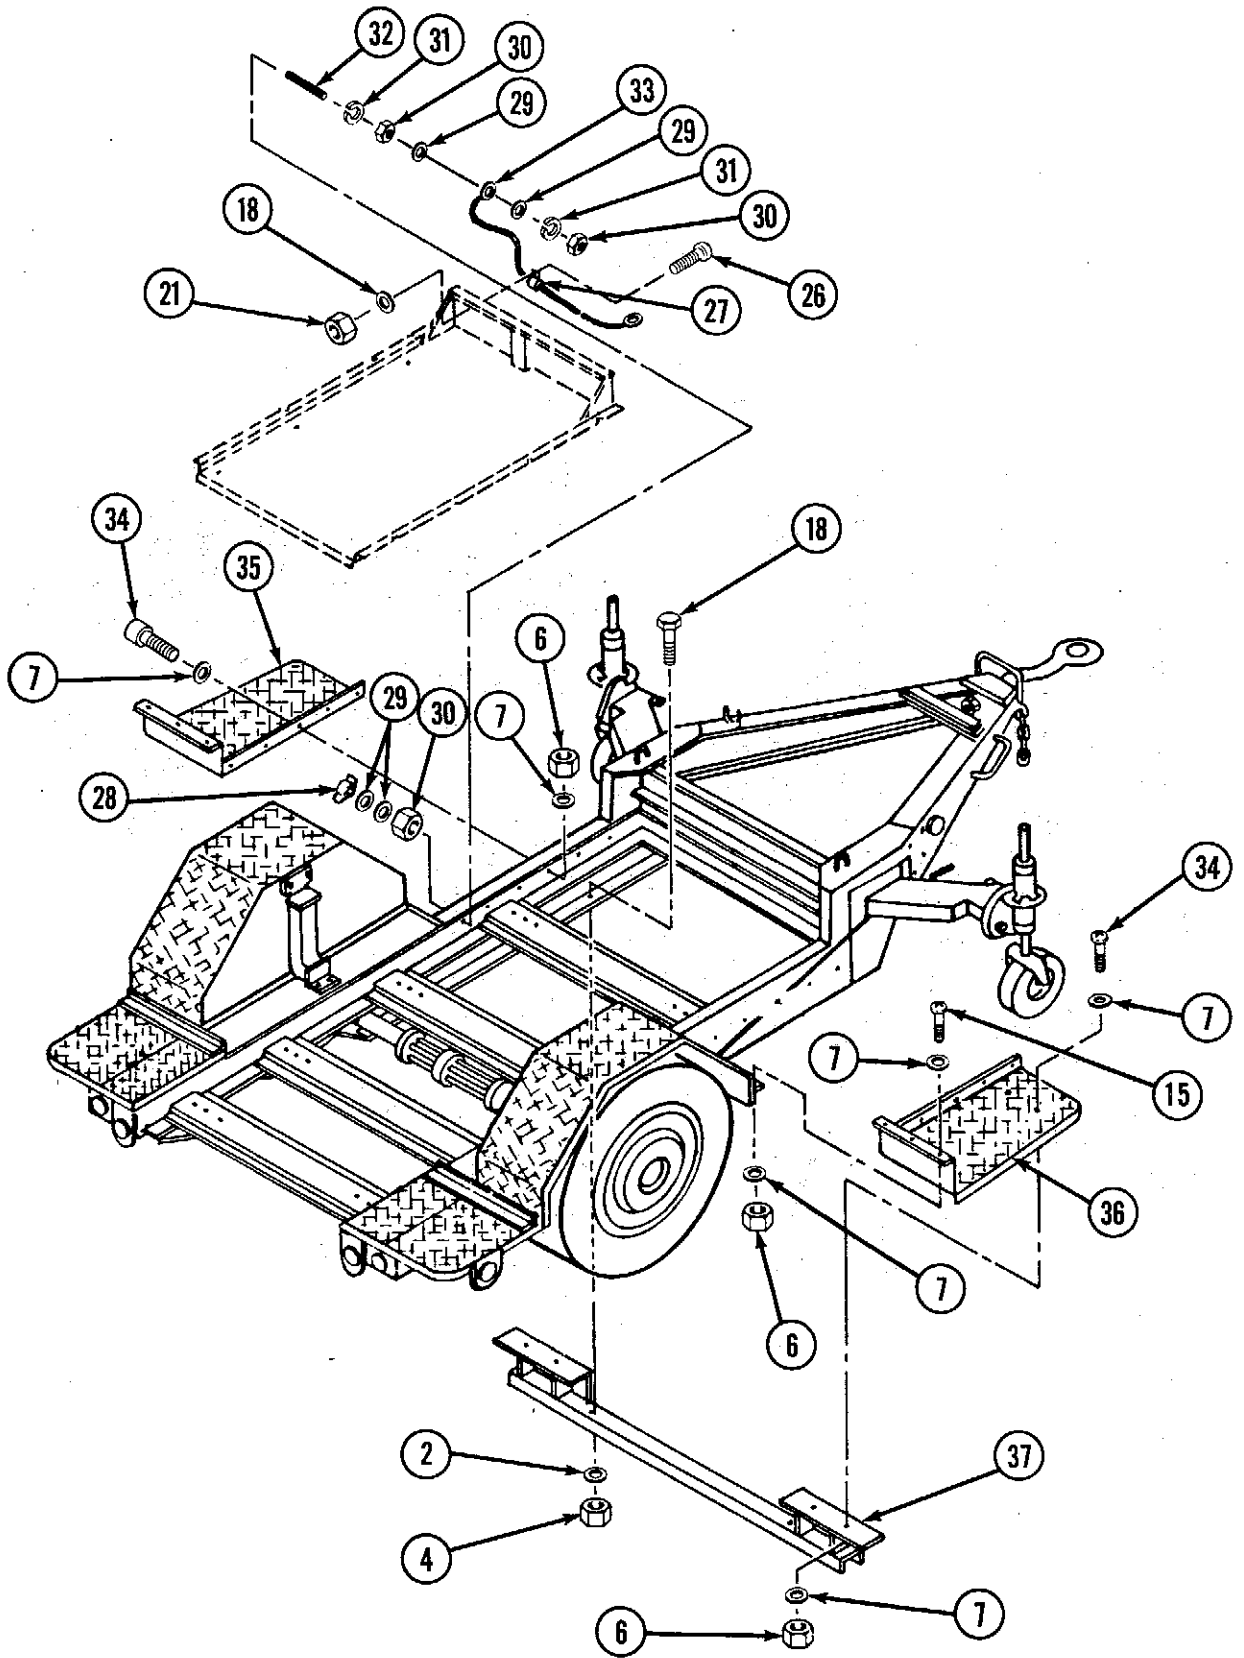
Trailer Assembly (Sheet 2 of 3)
